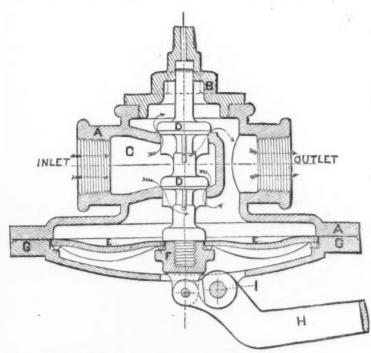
Section through Outlet and Inlet Pipes, showing Lever and the Course of the Steam.
